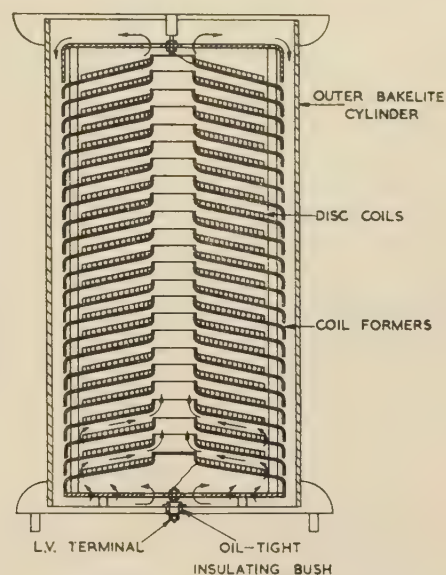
Sectional drawing of h.v. resistor, showing oil baffles.
